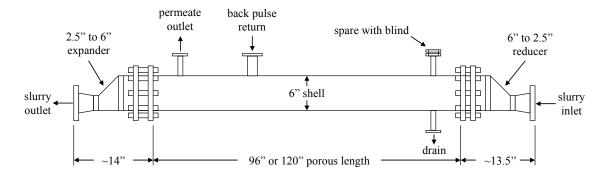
PEP Filter Bundle Assembly with Key Geometric Parameters Listed (drawing not to scale)
